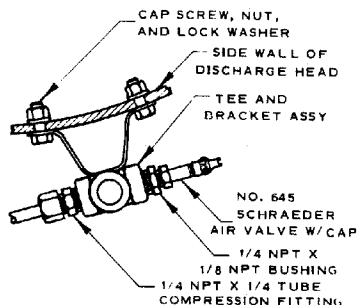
Detail Of Tee And Bracket Assembly Attachment To Discharge Head Wall.
